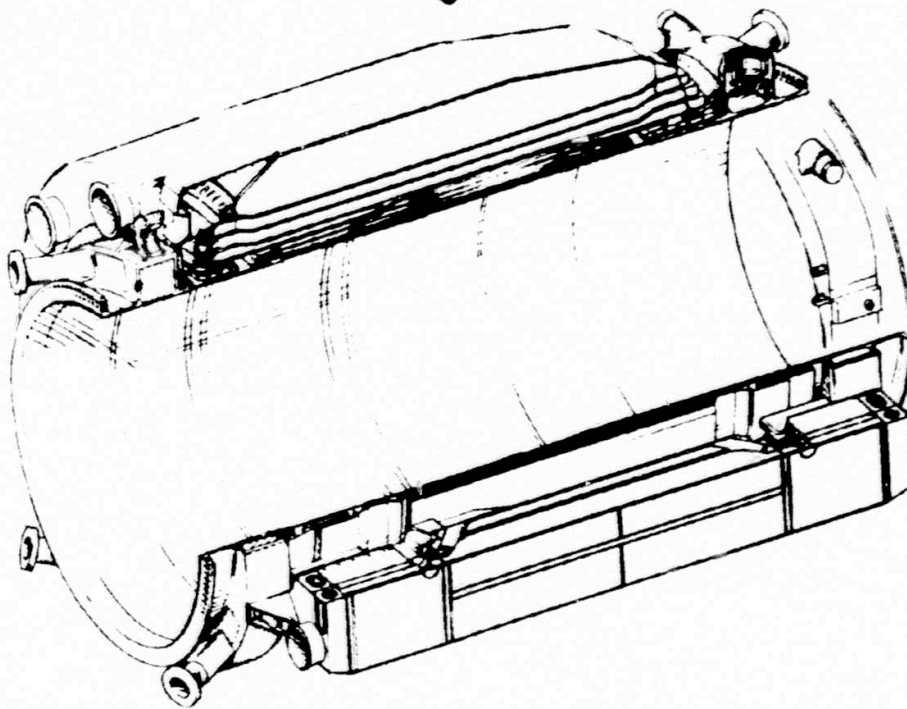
Side shield assembly (Dwg G-1445)
